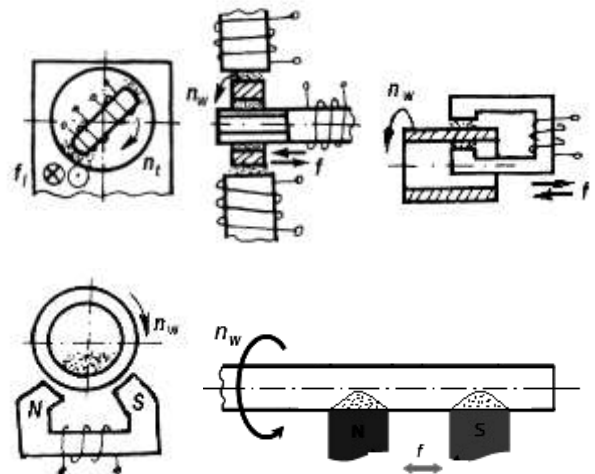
Magnetic abrasive machining of internal revolution surfaces (n_w – workpiece rotation, f – feed movement, n_t – rotation of a so-called tool) (adapted from [2, 3, 4, 8, 29, 64, 76])
